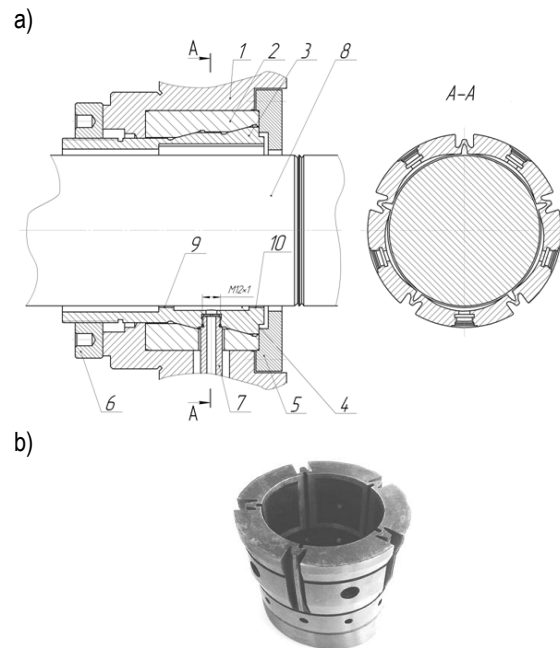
Drawing of adjustable radial HB a) and appearance b)
